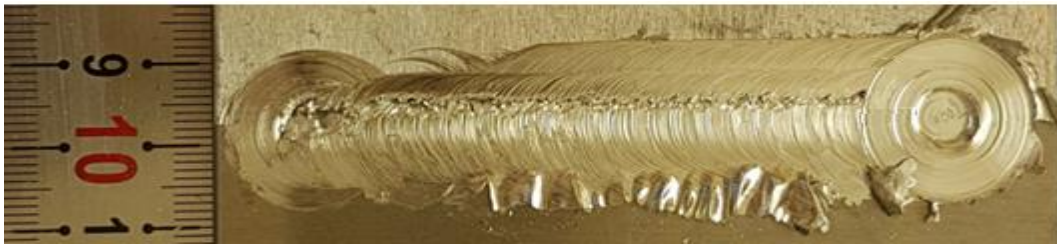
Welding of AZ 91 D (A.S.) and AA 7075 T6 (R.S.) in the condition of 900 revs/min, 25 mm/min
